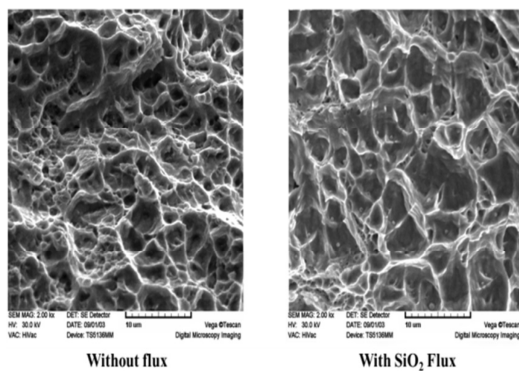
Scanning electron microscopy of fracture surface.
